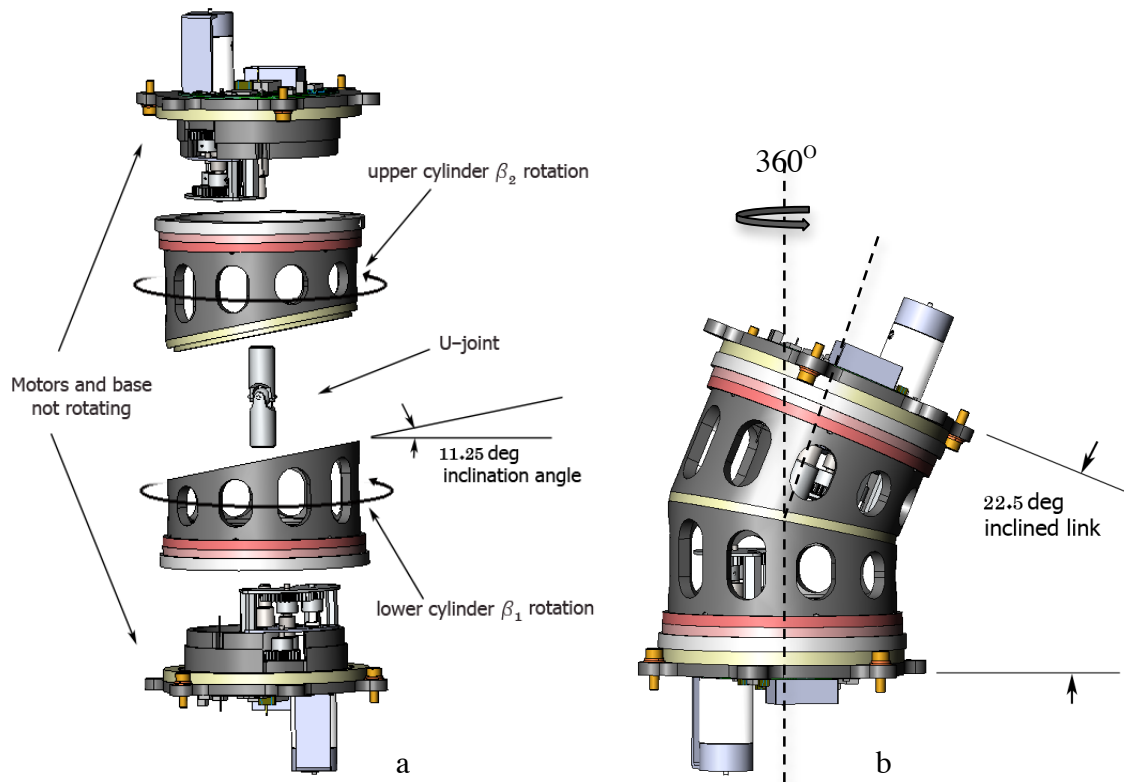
a) Exploded view of a link b) Link bent at 22.5°.
